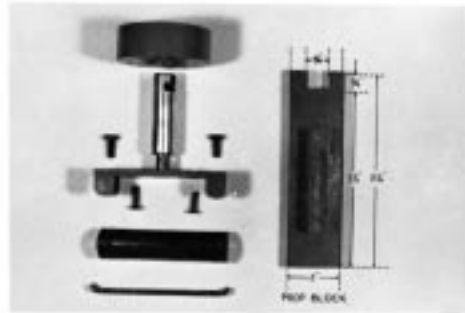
Components of Abrasion Head (dimensions shown are for the C-100 machine)
